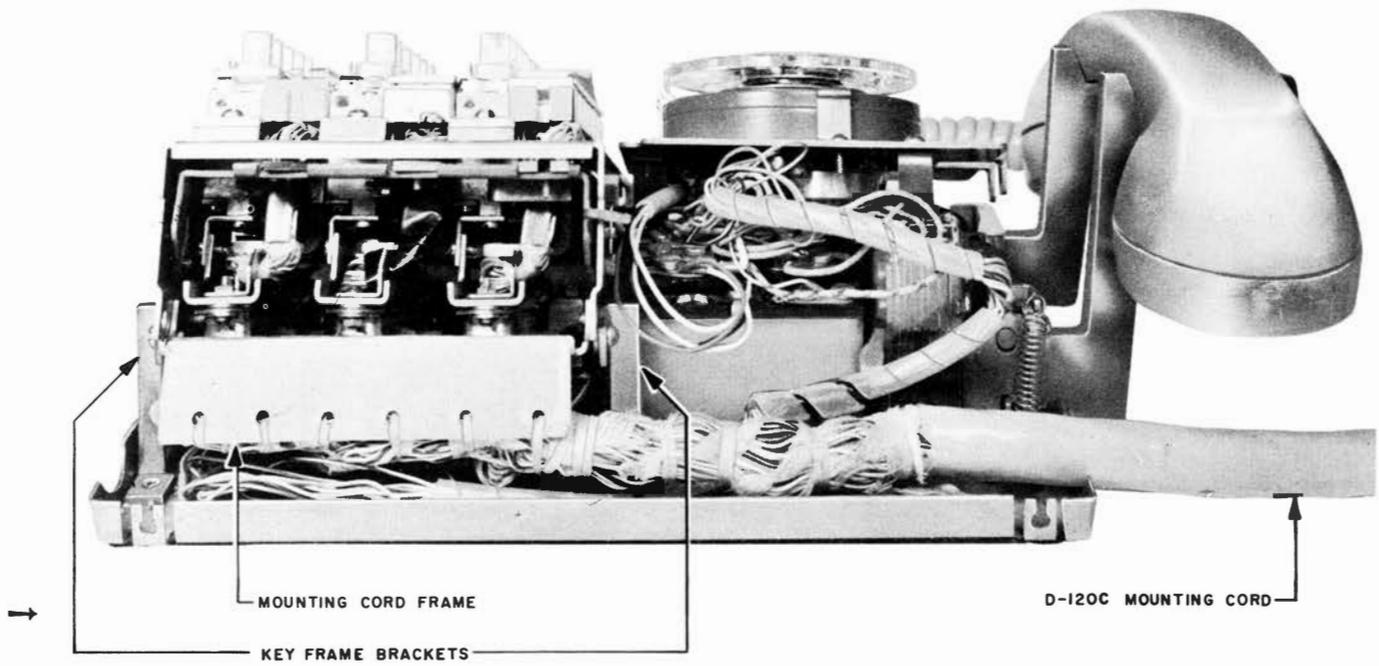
600-Type Telephone Set, Housing Removed, Rear View
